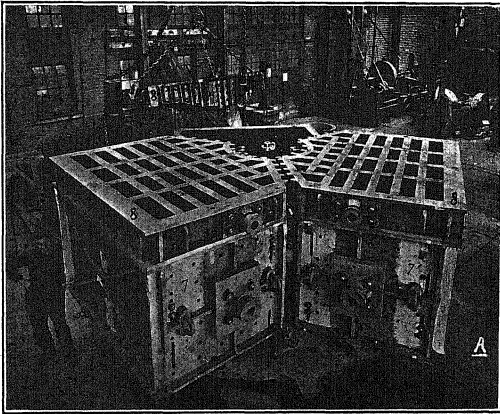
BASE, OR ASSEMBLY PLATE, WITH NOWEL AND COPE.
